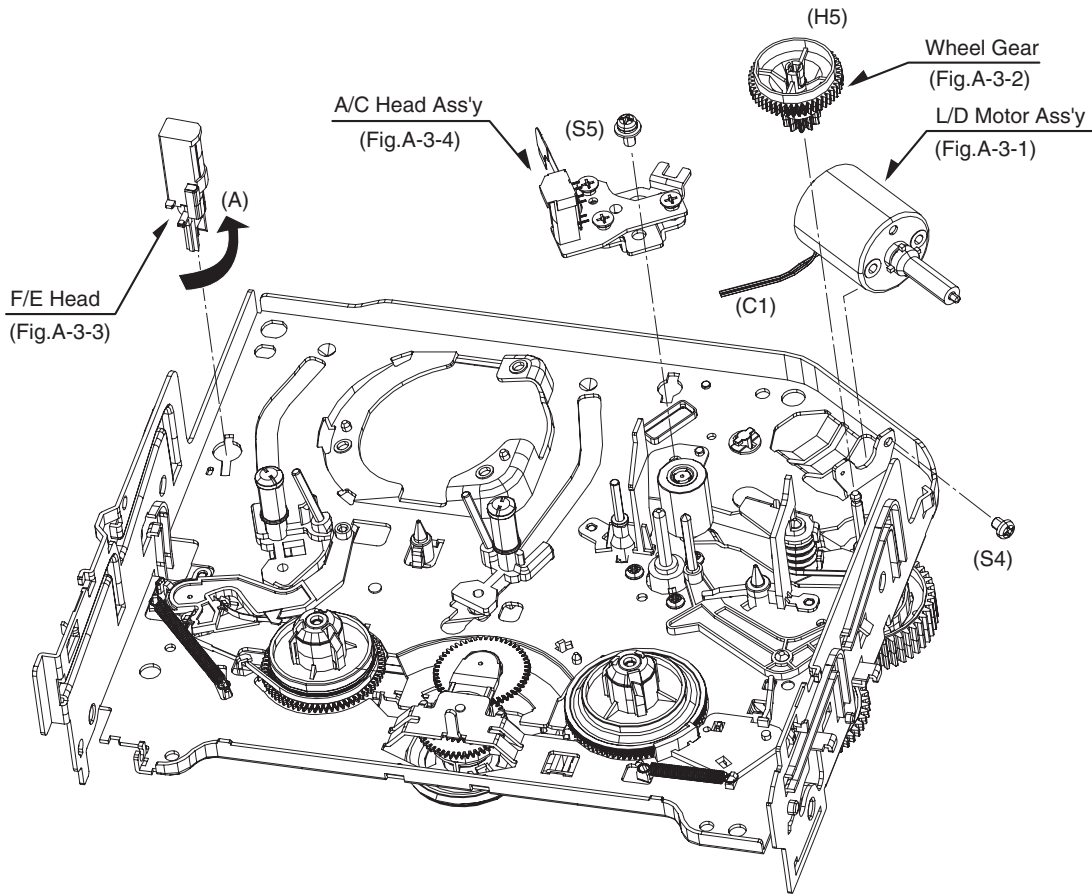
L/D Motor Ass'y, Wheel Gear, F/E Head, A/C Head Ass'y
